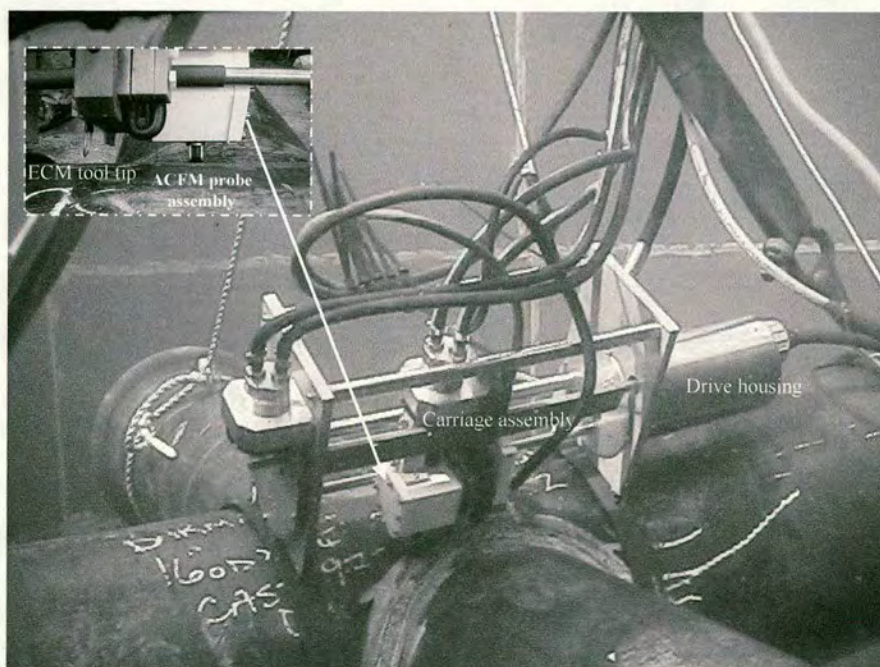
ECM/ACFM system during submersed operation in test tank with a close up of the ECM tool (retracted) and ACFM probe (deployed) aligned at the weld
